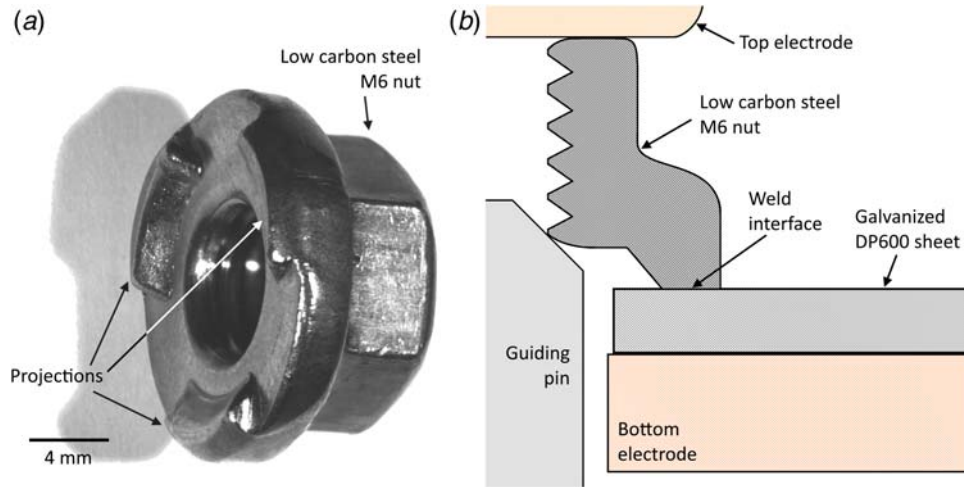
(a) Image of projection weld nut and (b) schematic of projection welding setup
